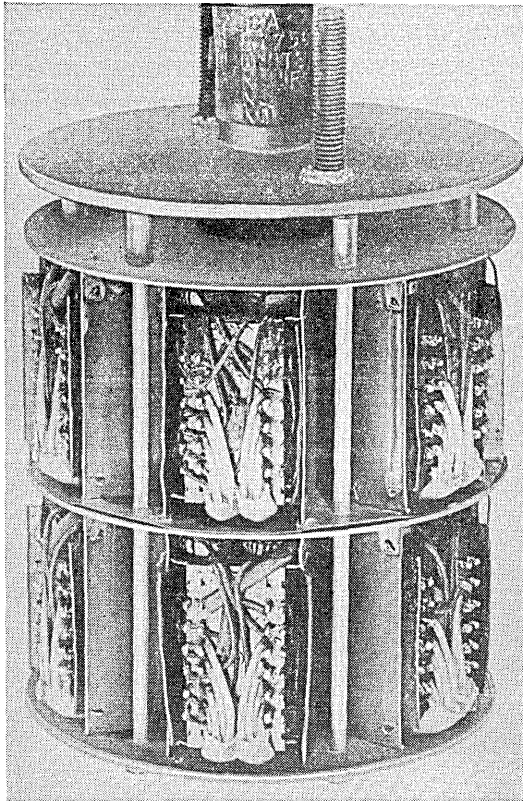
Potting assembly methods—medium and large size complements of MF-type units. For placement in cylindrical, thin steel, casings.
